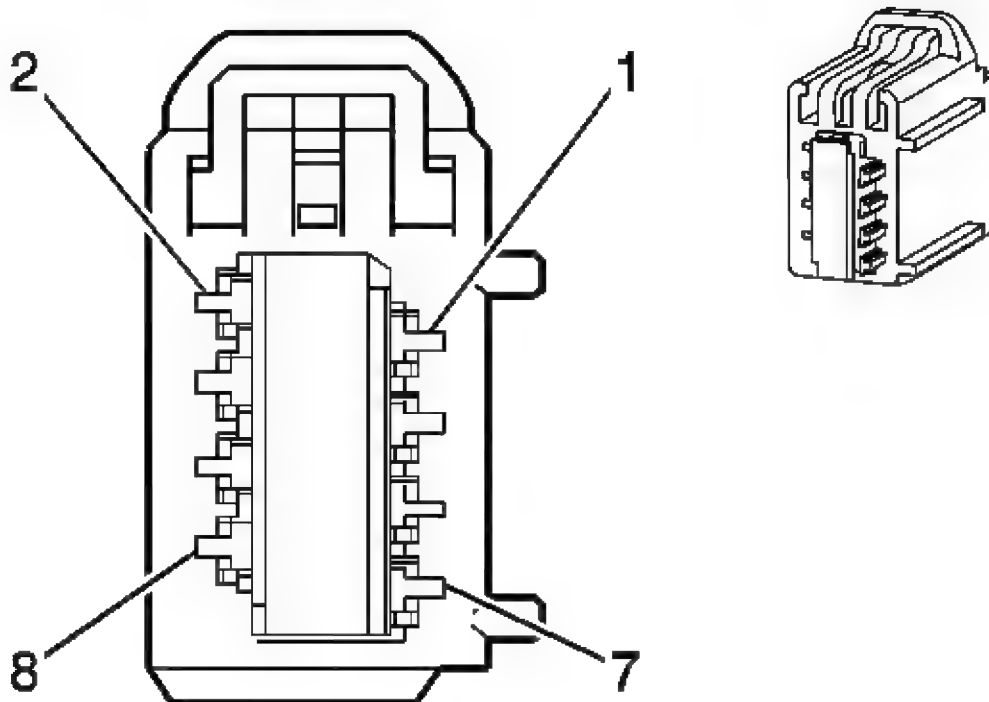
Driver Seat Back Ventilation Heat & Cool Module (KB6) Connector End View
